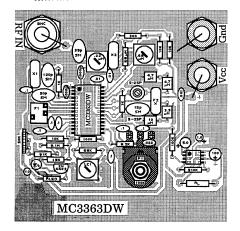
PC BOARD CIRCUIT SIDE VIEW
